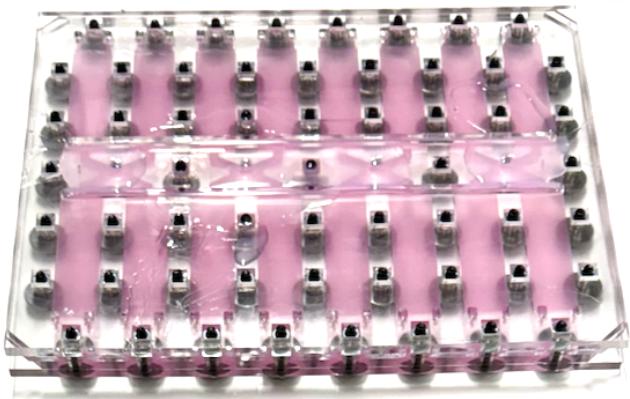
The mold shown in Fig. 5 after the pieces have been screwed together, and filled with mixed DS30 using the injection molding machine shown in Fig. 6. The use of this mold allows for the fabrication of many silicone blocks at once.
